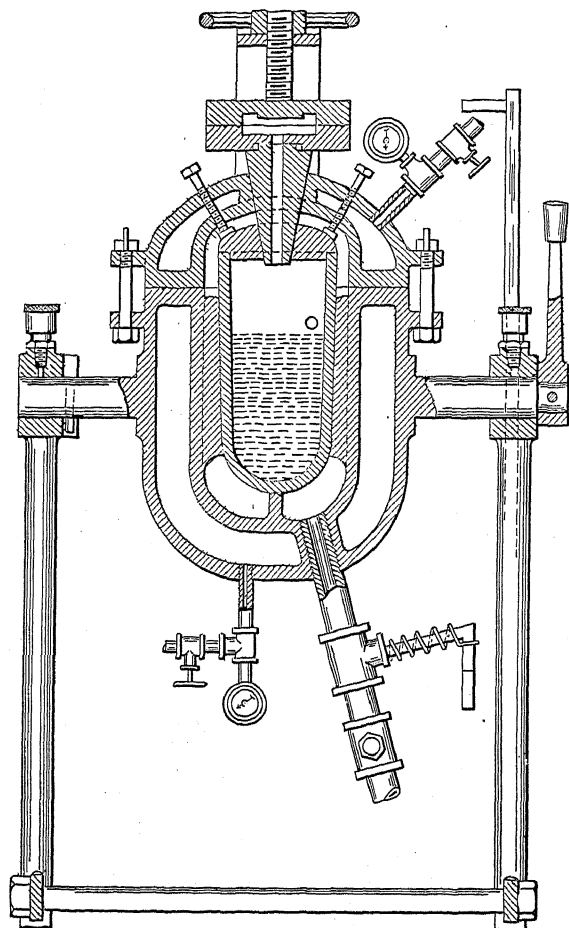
CHANDLER DIE-CASTING MACHINE.
